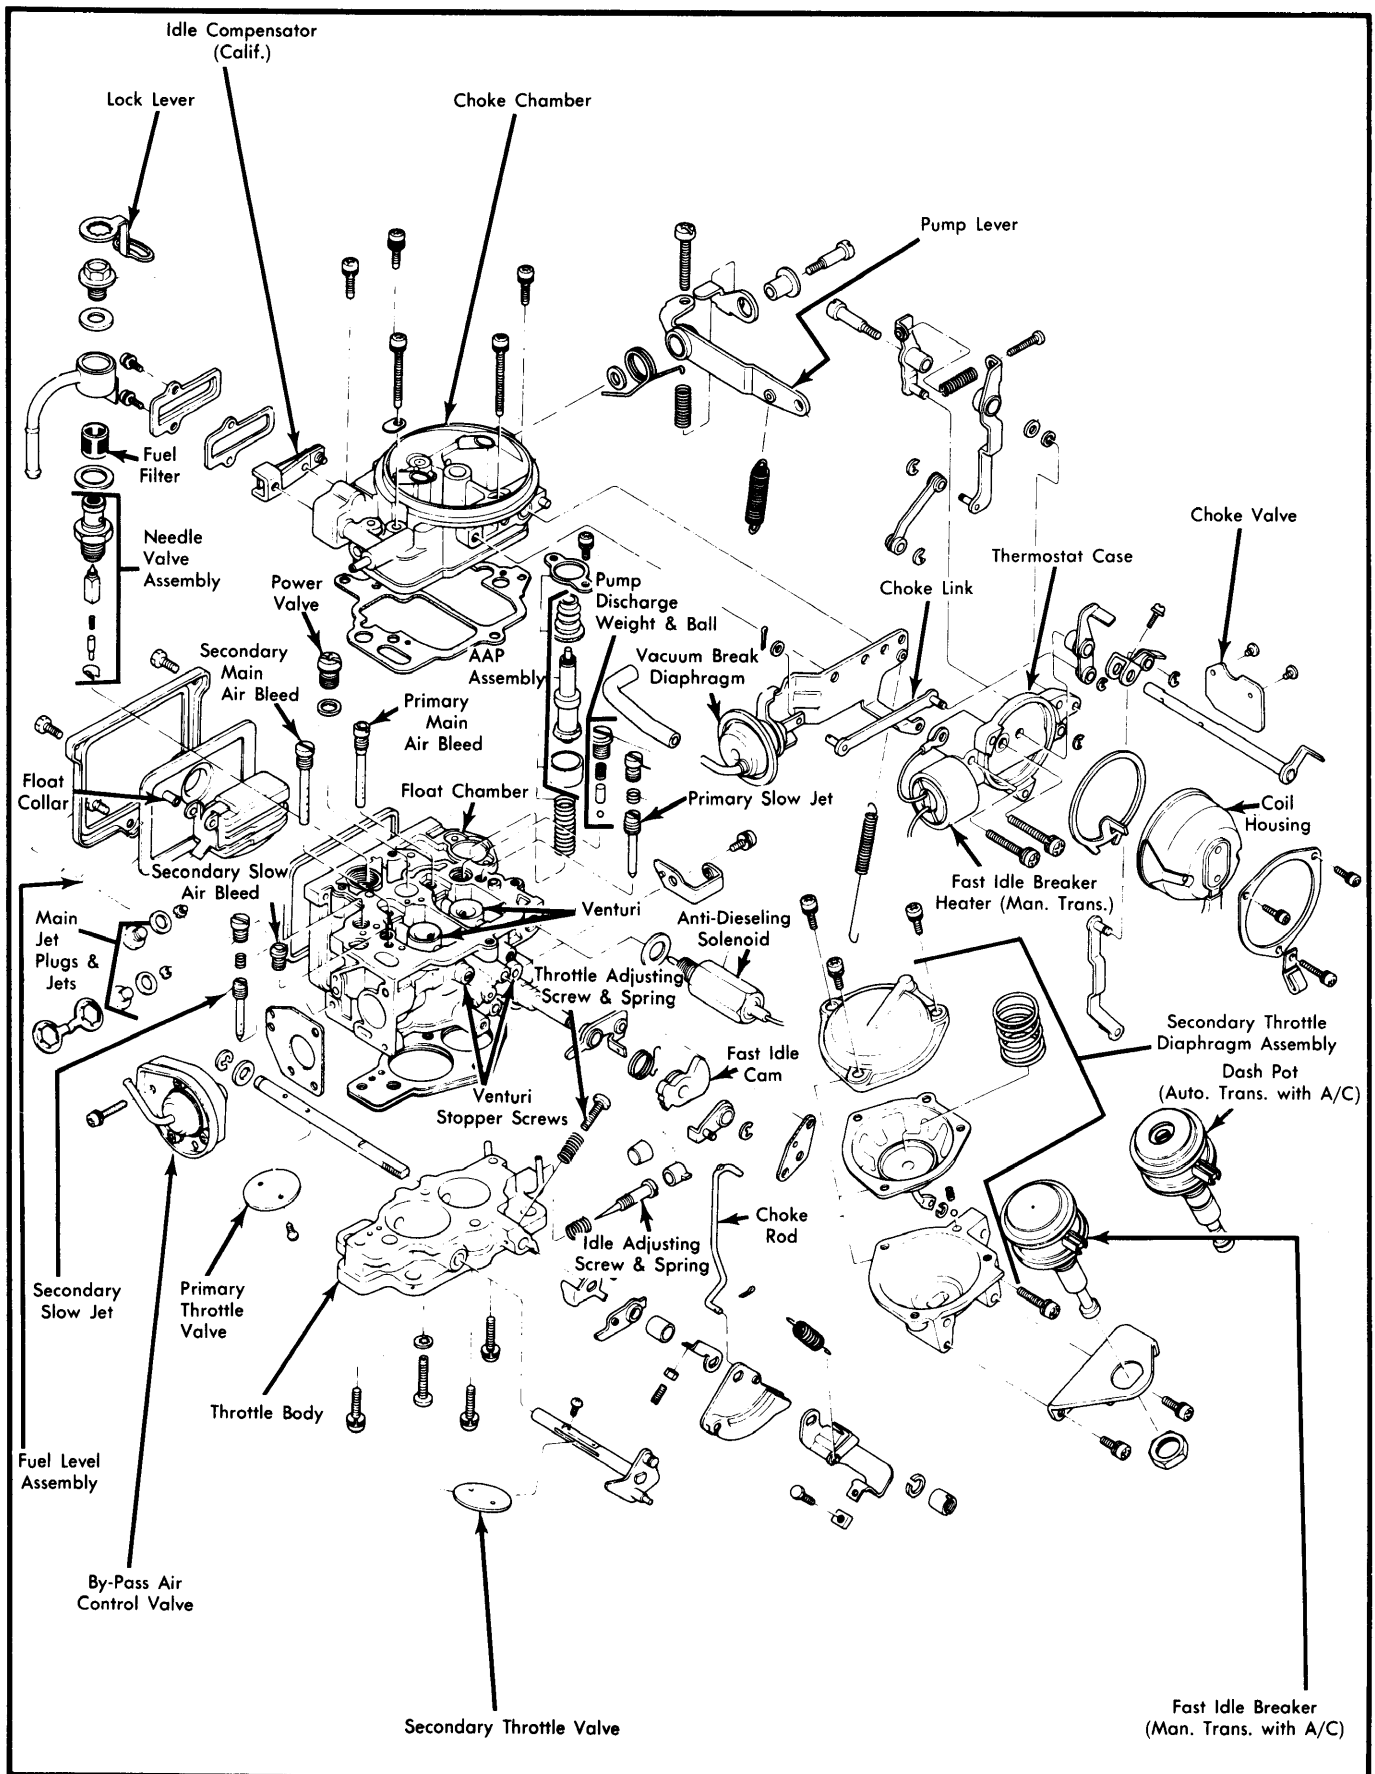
Exploded View of Hitachi DCR360 2-Barrel Carburetor
